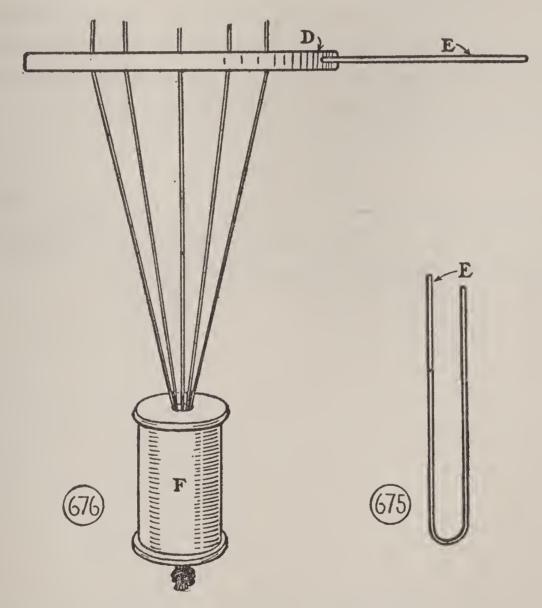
Detail of Wire Handle. Fig. 676.—Detail of Spool Pendulum.
